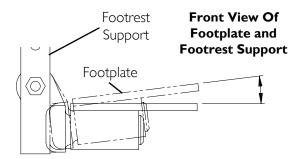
Adjusting Flip-Up Footplate Perpendicular and/or Inversion/Eversion
